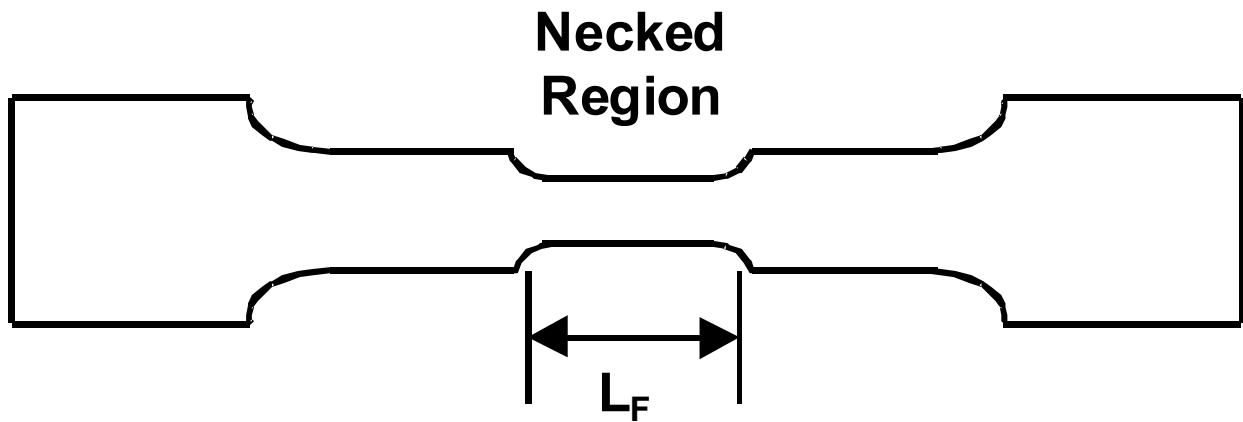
Drawing of ASTM dogbone sample with necked gage section
